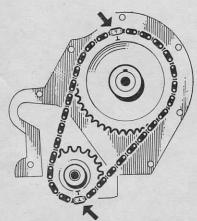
This illestration shows how the bright links on the timing chain engage with the marked chain wheels.
